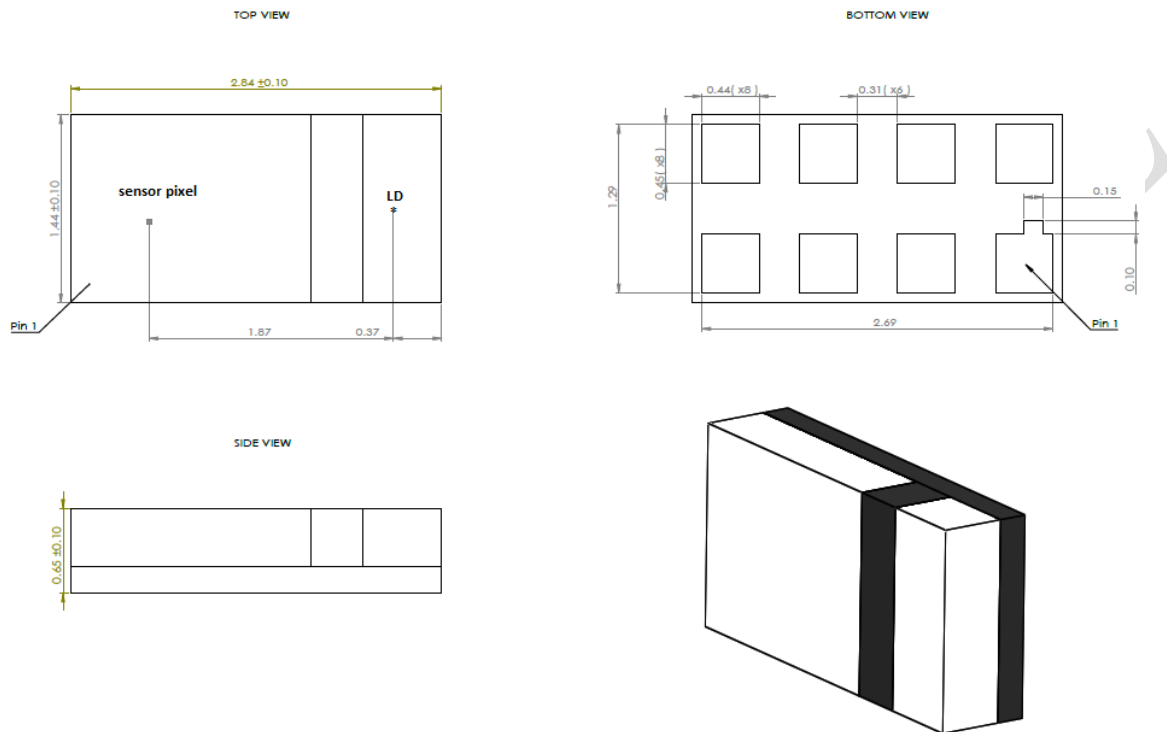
MN58406D Package of Dimension (Unit: mm)
